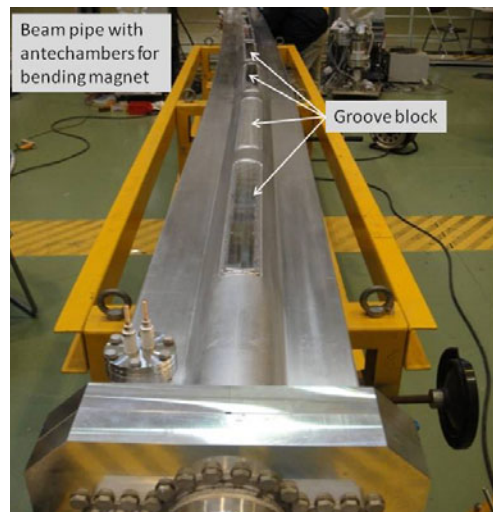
Test beam pipe with groove blocks for a bending magnet of Super-KEKB, where the groove block were machined and welded on the chamber.
